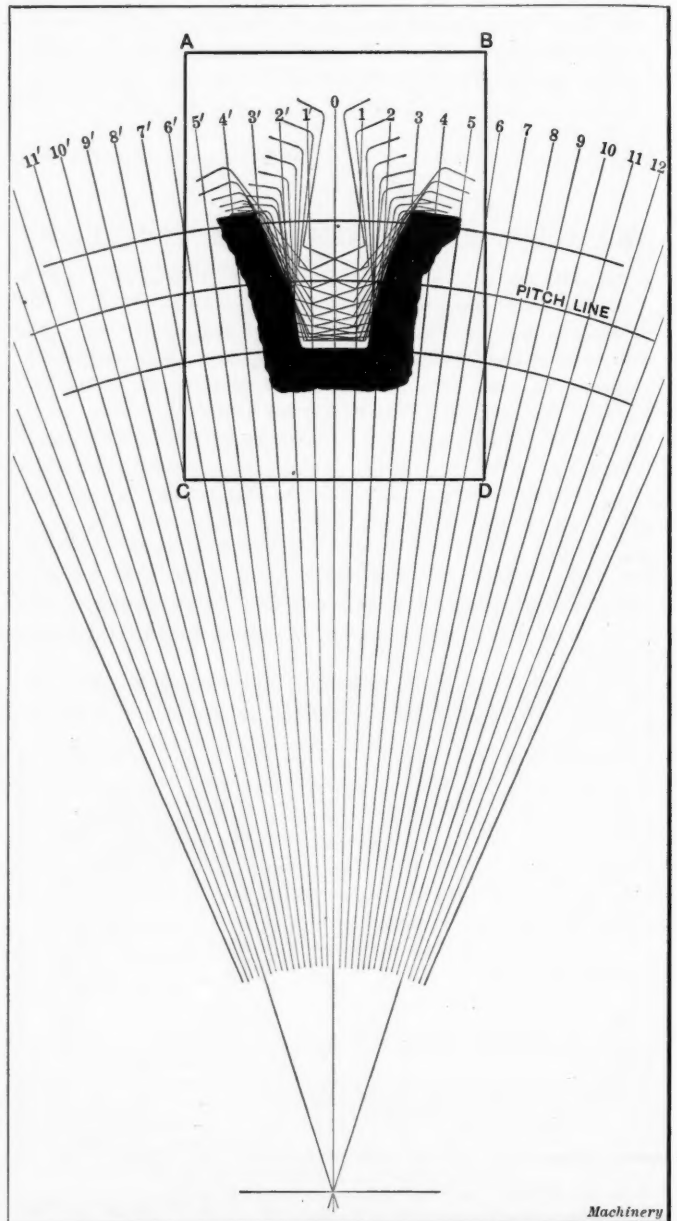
Tracing of Rack Tooth in Various Positions, giving Form of Gear-cutter
